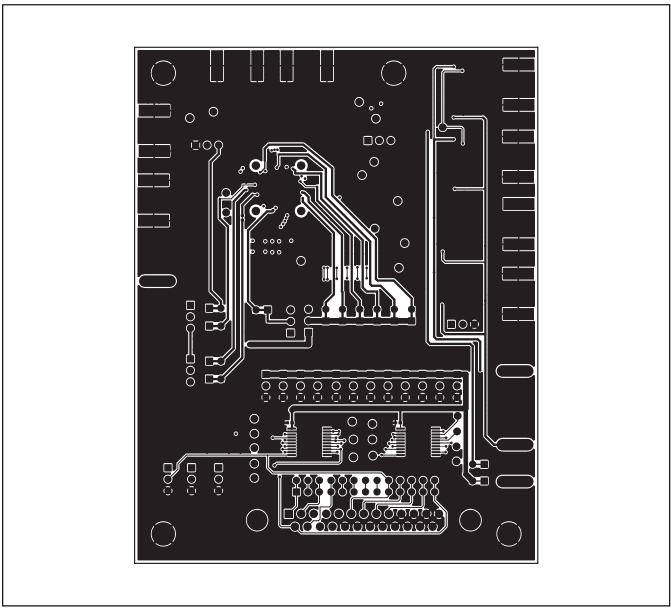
MAX2837 EV Kit PCB Layout—Solder Side
